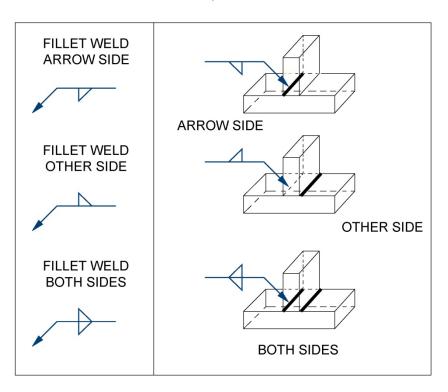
This figure shows the weld location in isometric view, based on the welding symbol.
